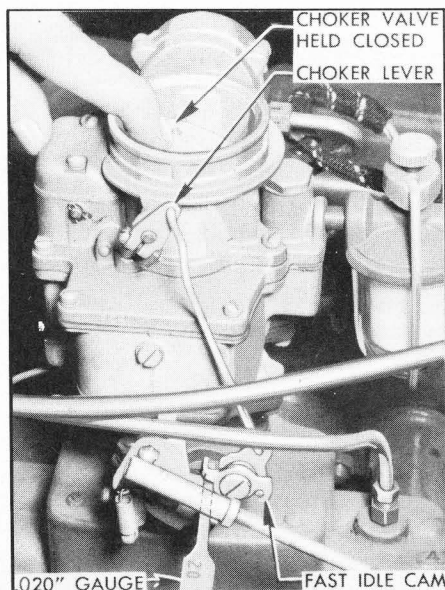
Clearance Between Fast Idle Cam and Boss
